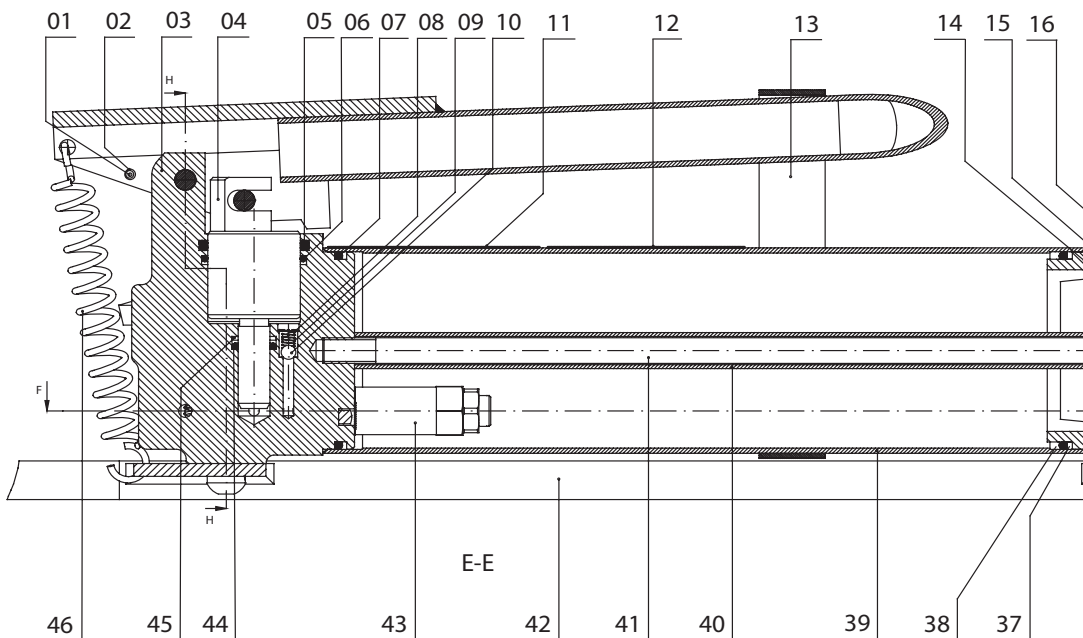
LONGITUDINAL SECTION – COUPE LONGITUDINALE – SCHNITTZEICHNUNG
